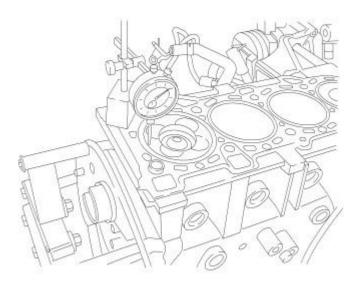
DECK HEIGHT Courtesy of CHRYSLER LLC
